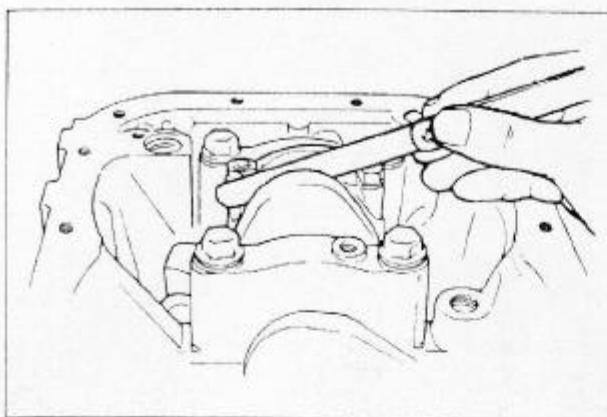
A — 82 MEASURING BIG-END THRUST CLEARANCE
